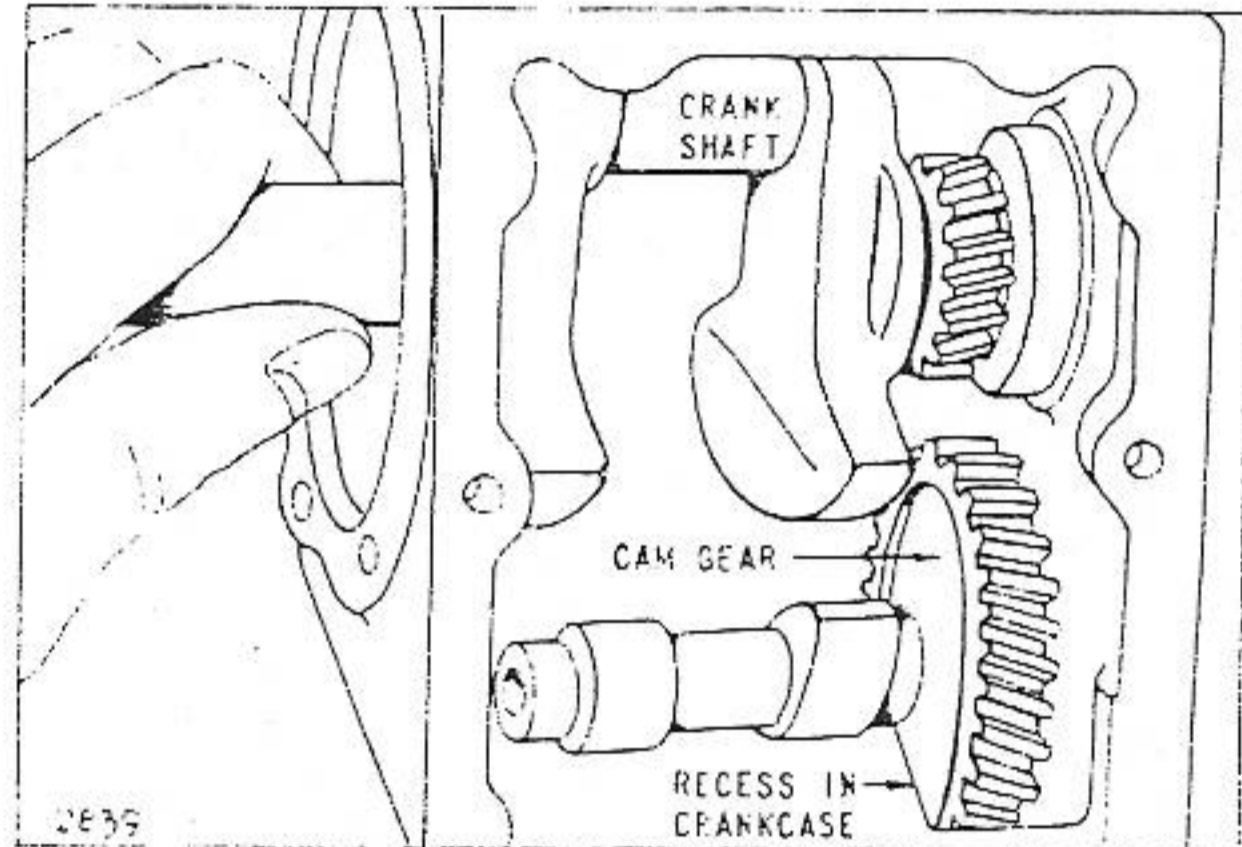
REMOVE OR ASSEMBLE CRANKSHAFT
